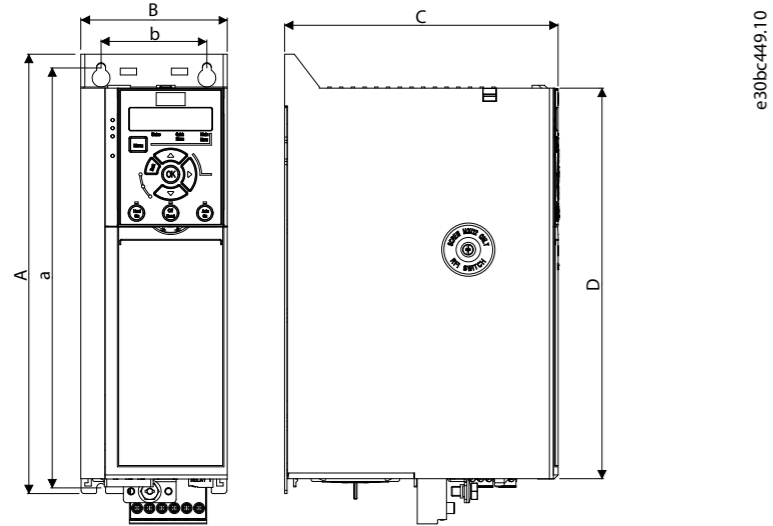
Mechanical Dimensions, Enclosure Sizes J1–J7
